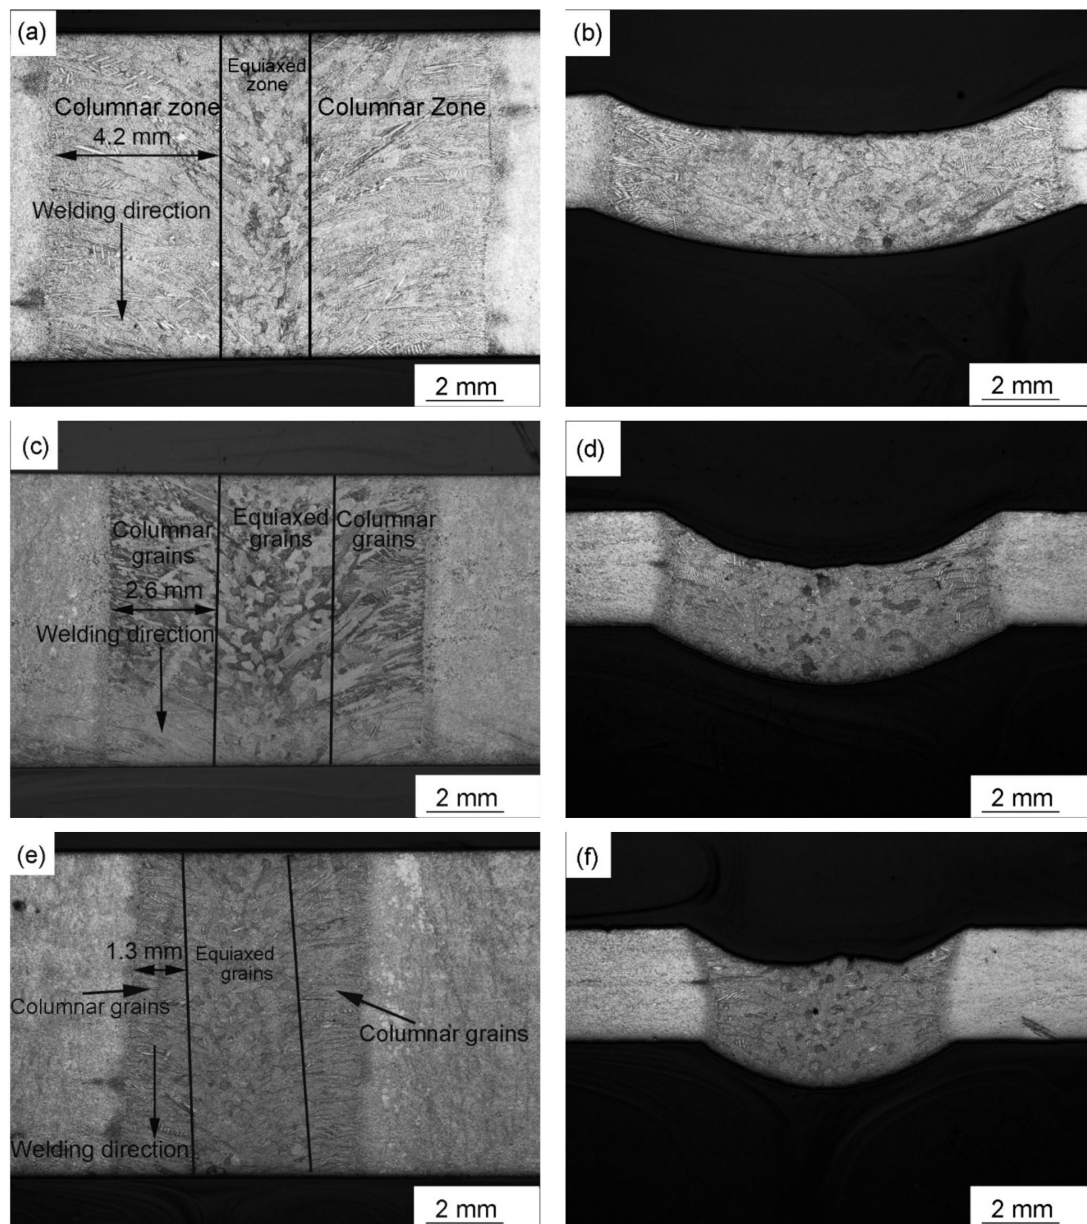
The macrostructures of the as-welded fusion zone for AZ31 GTA welds made using different welding speeds. (a) 3 mm/s (top surface). (b) 3 mm/s (weld cross-section). (c) 4 mm/s (top surface). (d) 4 mm/s (weld cross-section). (e) 5 mm/s (top surface). (f) 5 mm/s (weld cross-section).
